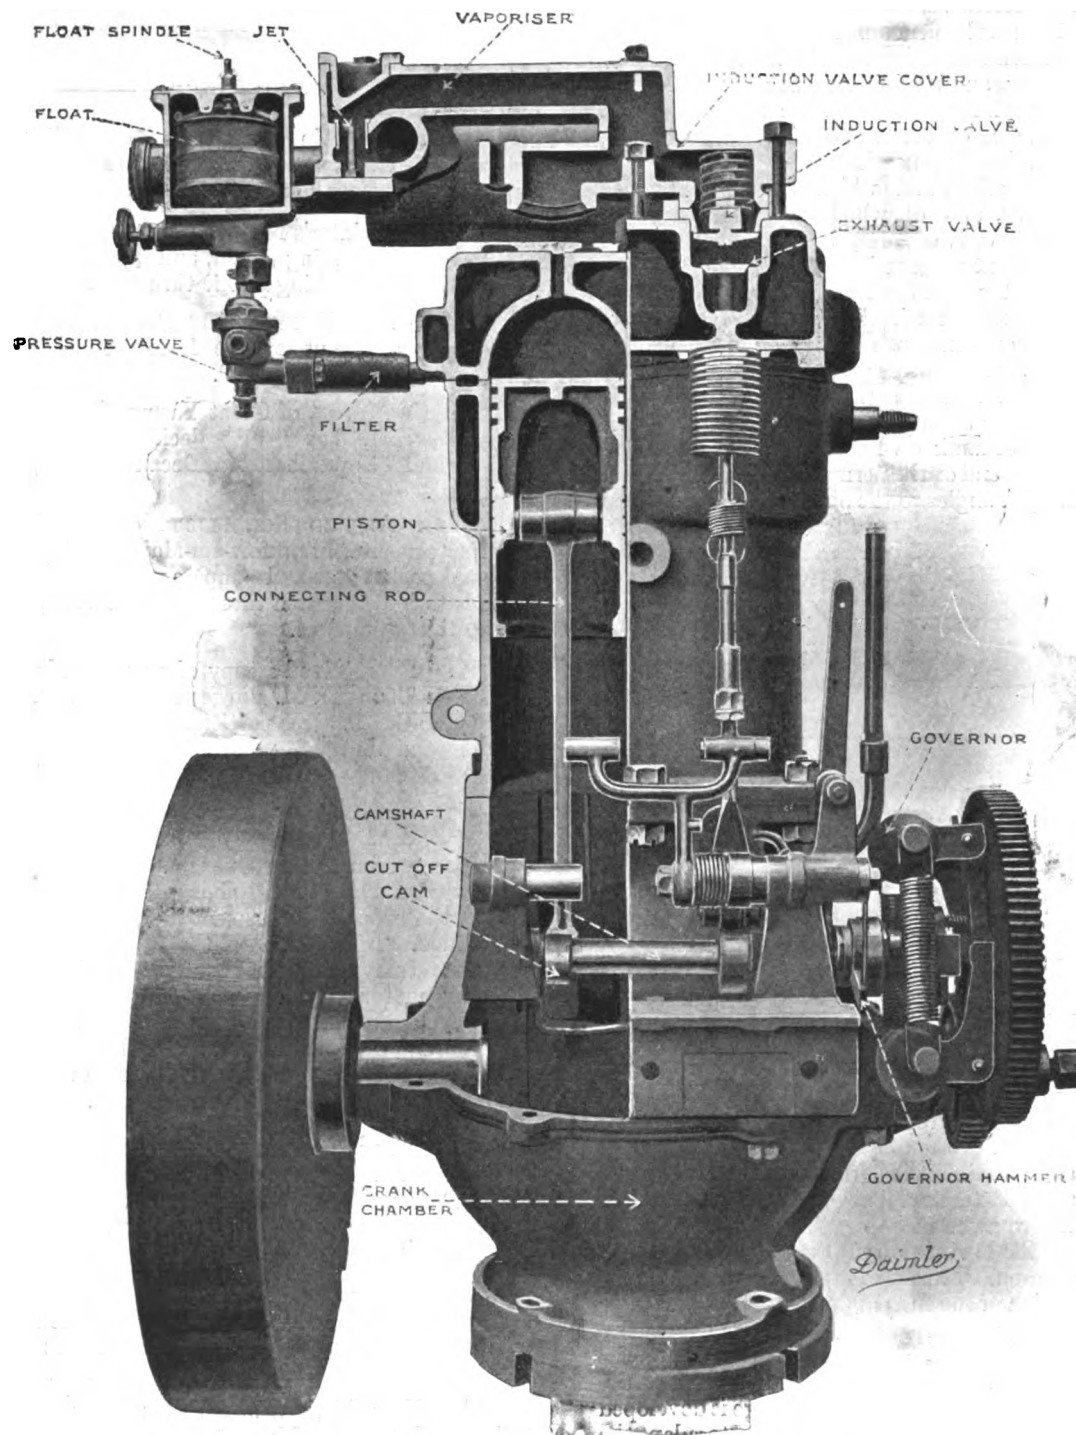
PART-SECTIONAL VIEW OF DAIMLER 6 B.H.P. PRESSURE-FEED MOTOR.
